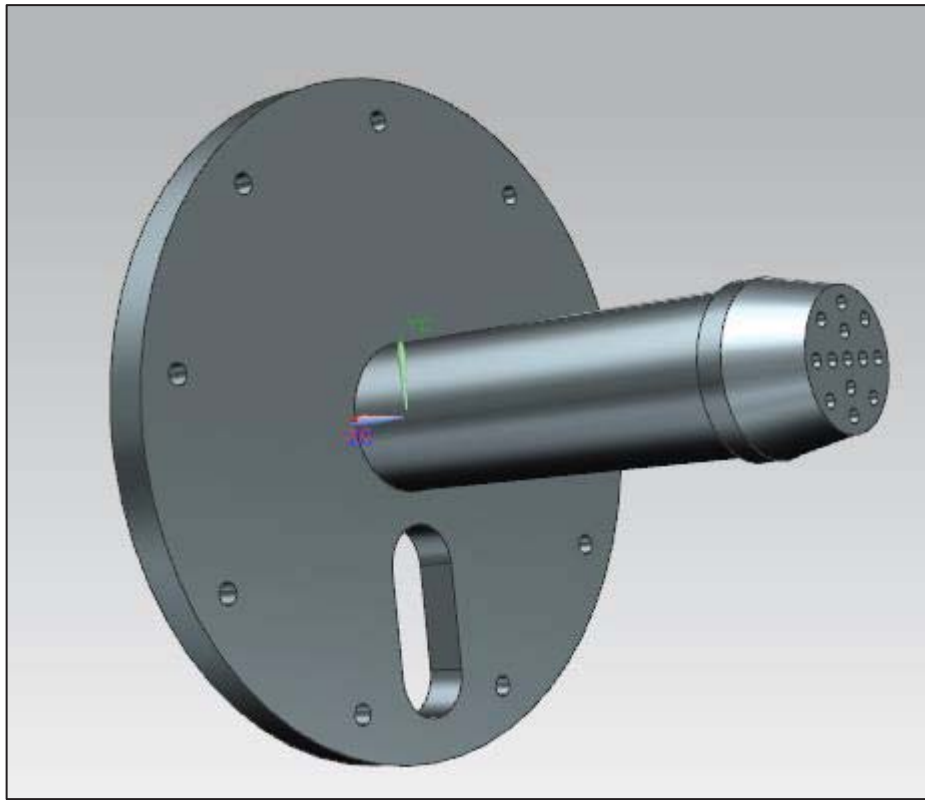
Multi - Tube Fuel Injector for high-hydrogen fuels
